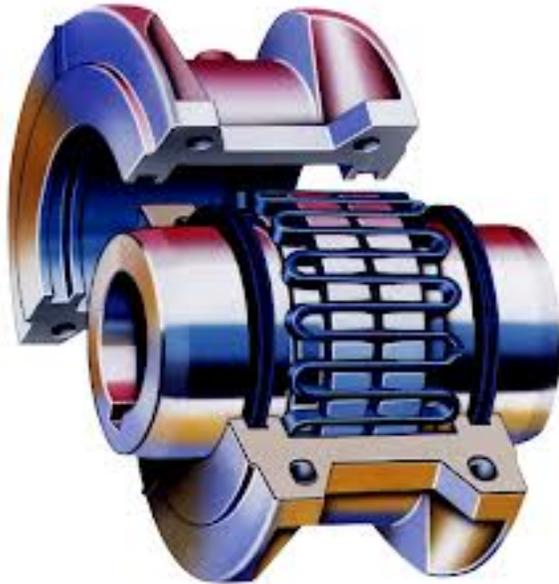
Grid Coupling (Image Credit: Falk)
